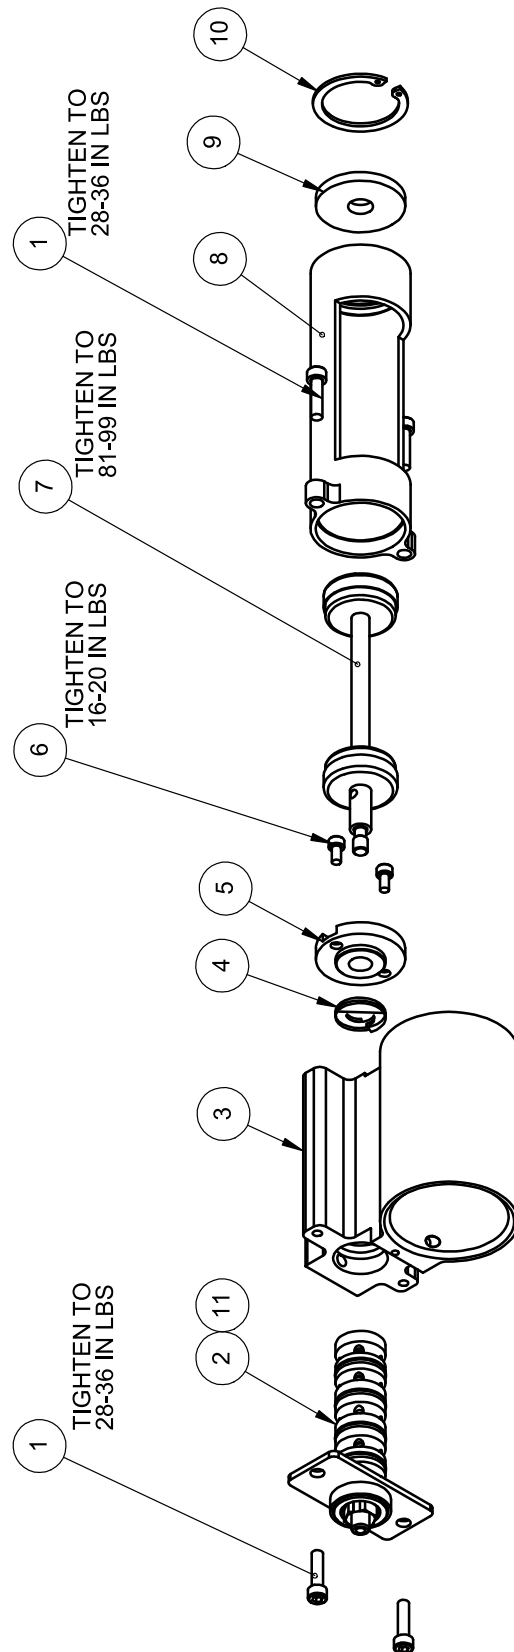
Shifter assembly/Standard Double-Acting pump
